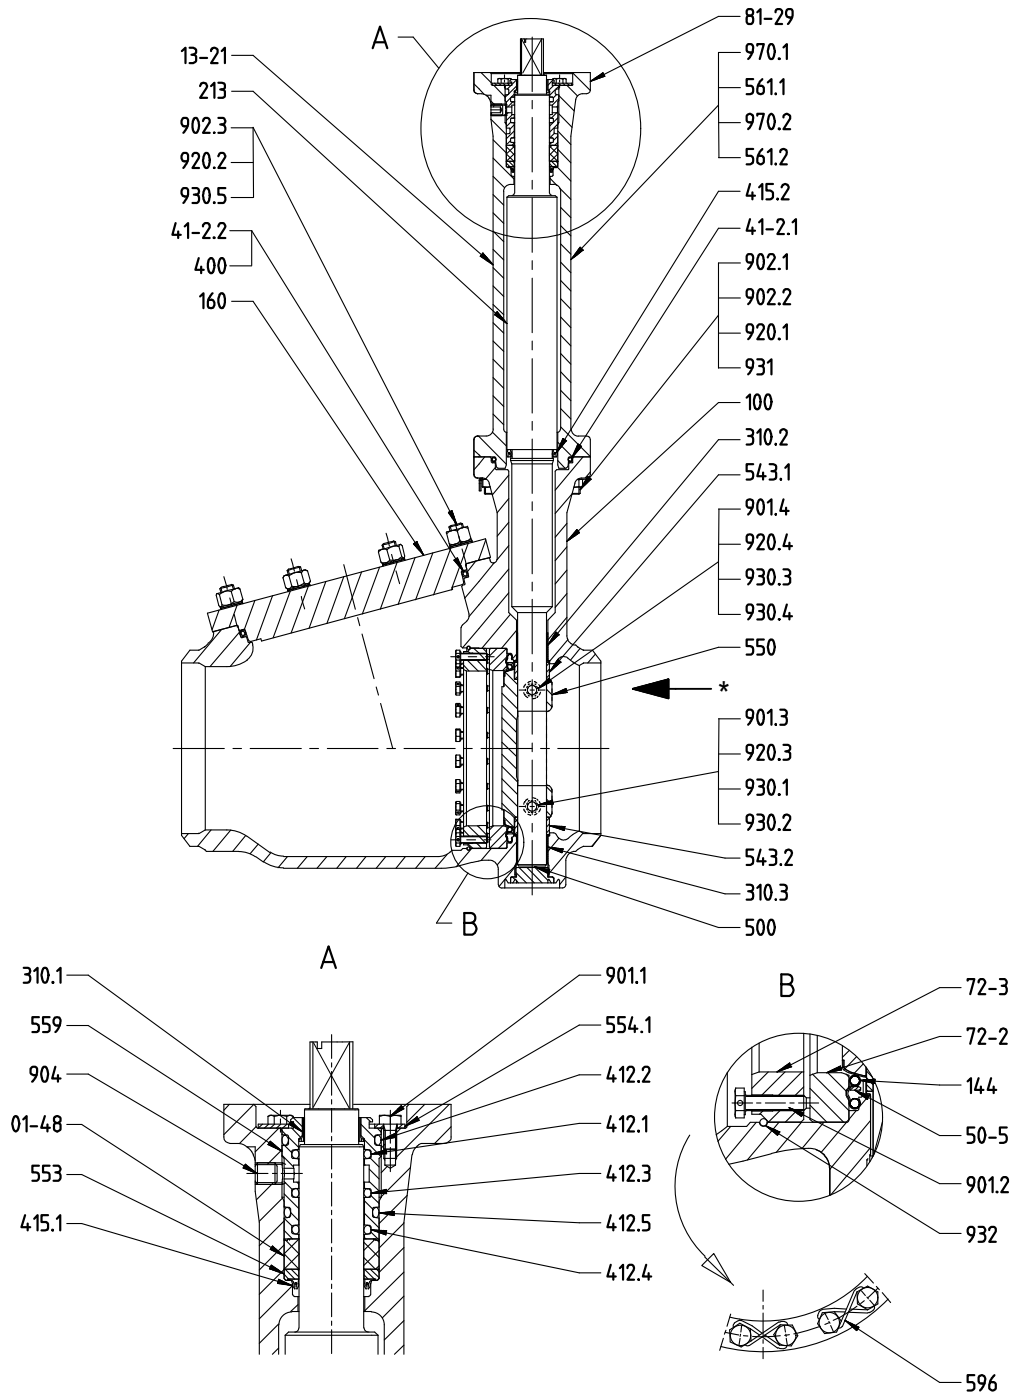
Sectional drawing of DANAIS CRYO BW - DN 100-150 (4-6 in.)
